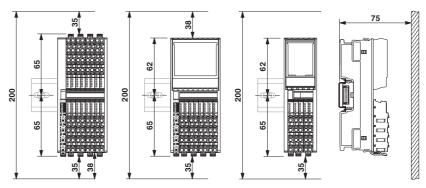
Mounting distances: I/O modules, housings 1F, 2F, 1H, 2H (dimensions rounded)
